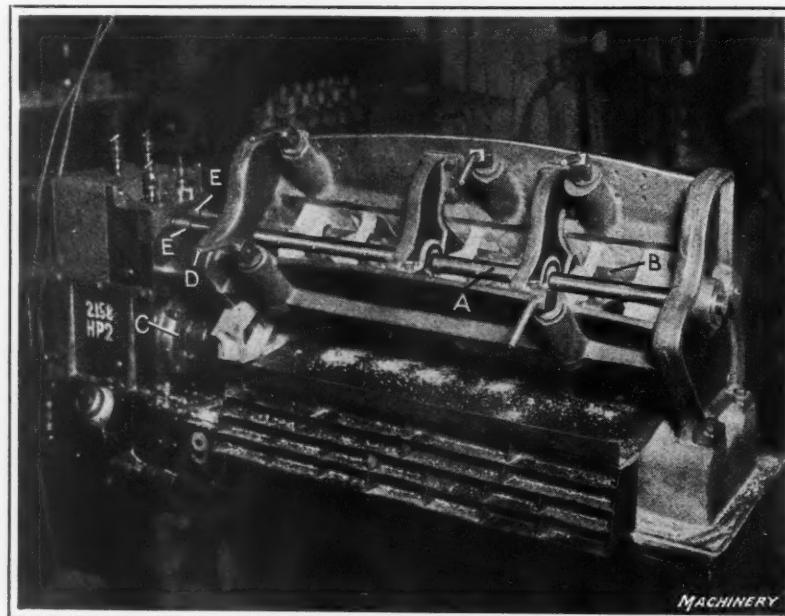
Double-spindle Machine for boring Engine Base Bearings
